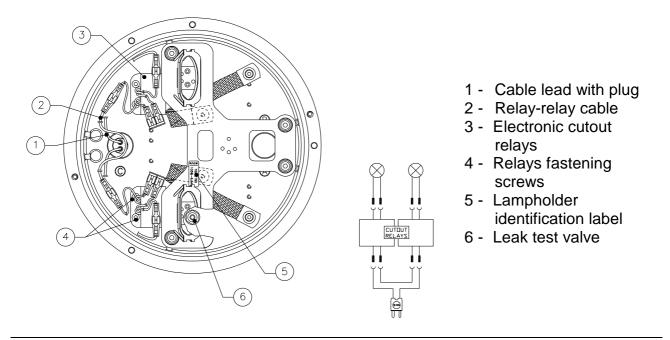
Lower cover with optional electronic cutout relays – Inside view
